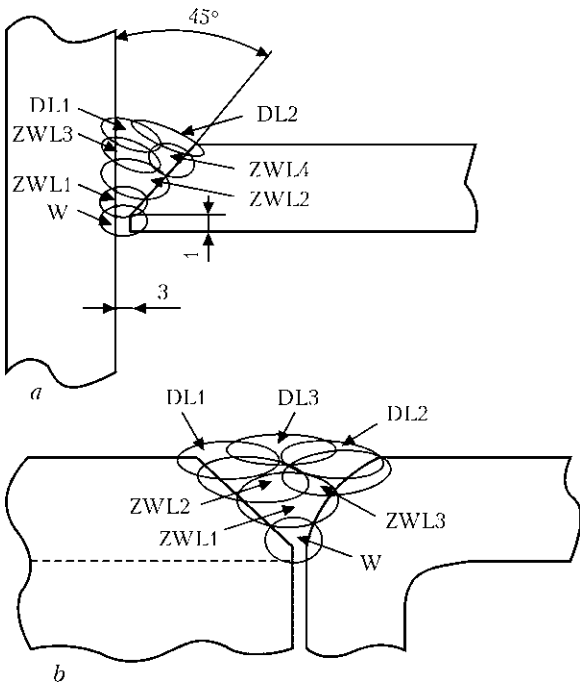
Schematic of edge preparation and sequence of welding for fillet (a) and butt (b) weld: W – weld root; ZWL – intermediate layer; DL – upper bead
